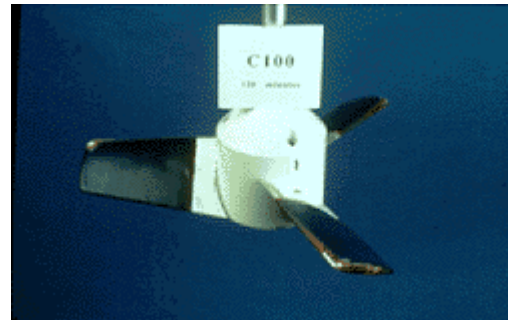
Accelerated abrasion tests with a model impeller show that reducing the leading-edge velocity cuts wear.
